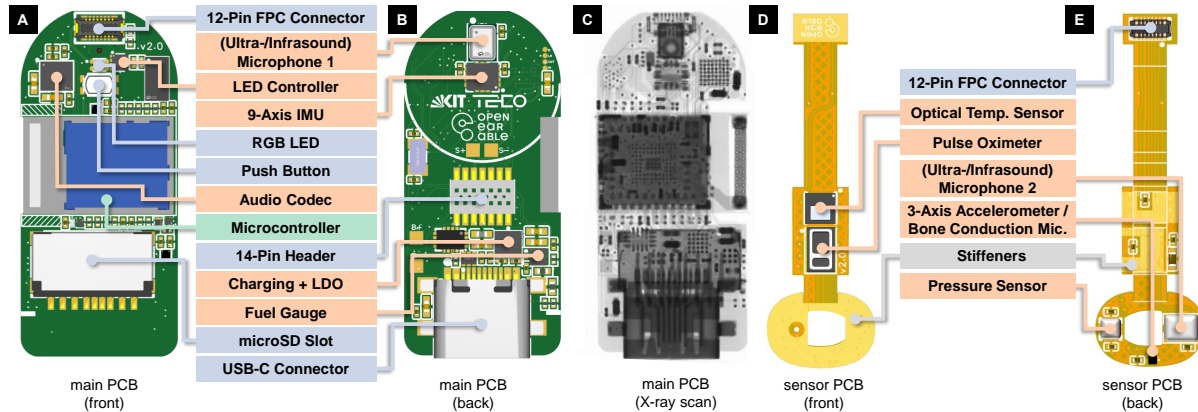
Overview of the different OpenEarable 2.0 PCBs. (A) front view of the main PCB; (B) back view of the main PCB; (C) X-ray scan of the main PCB revealing the high integration of different traces of the 4-layer PCB; (D) front view of the sensor flex PCB; (E) back view of the sensor flex PCB.
